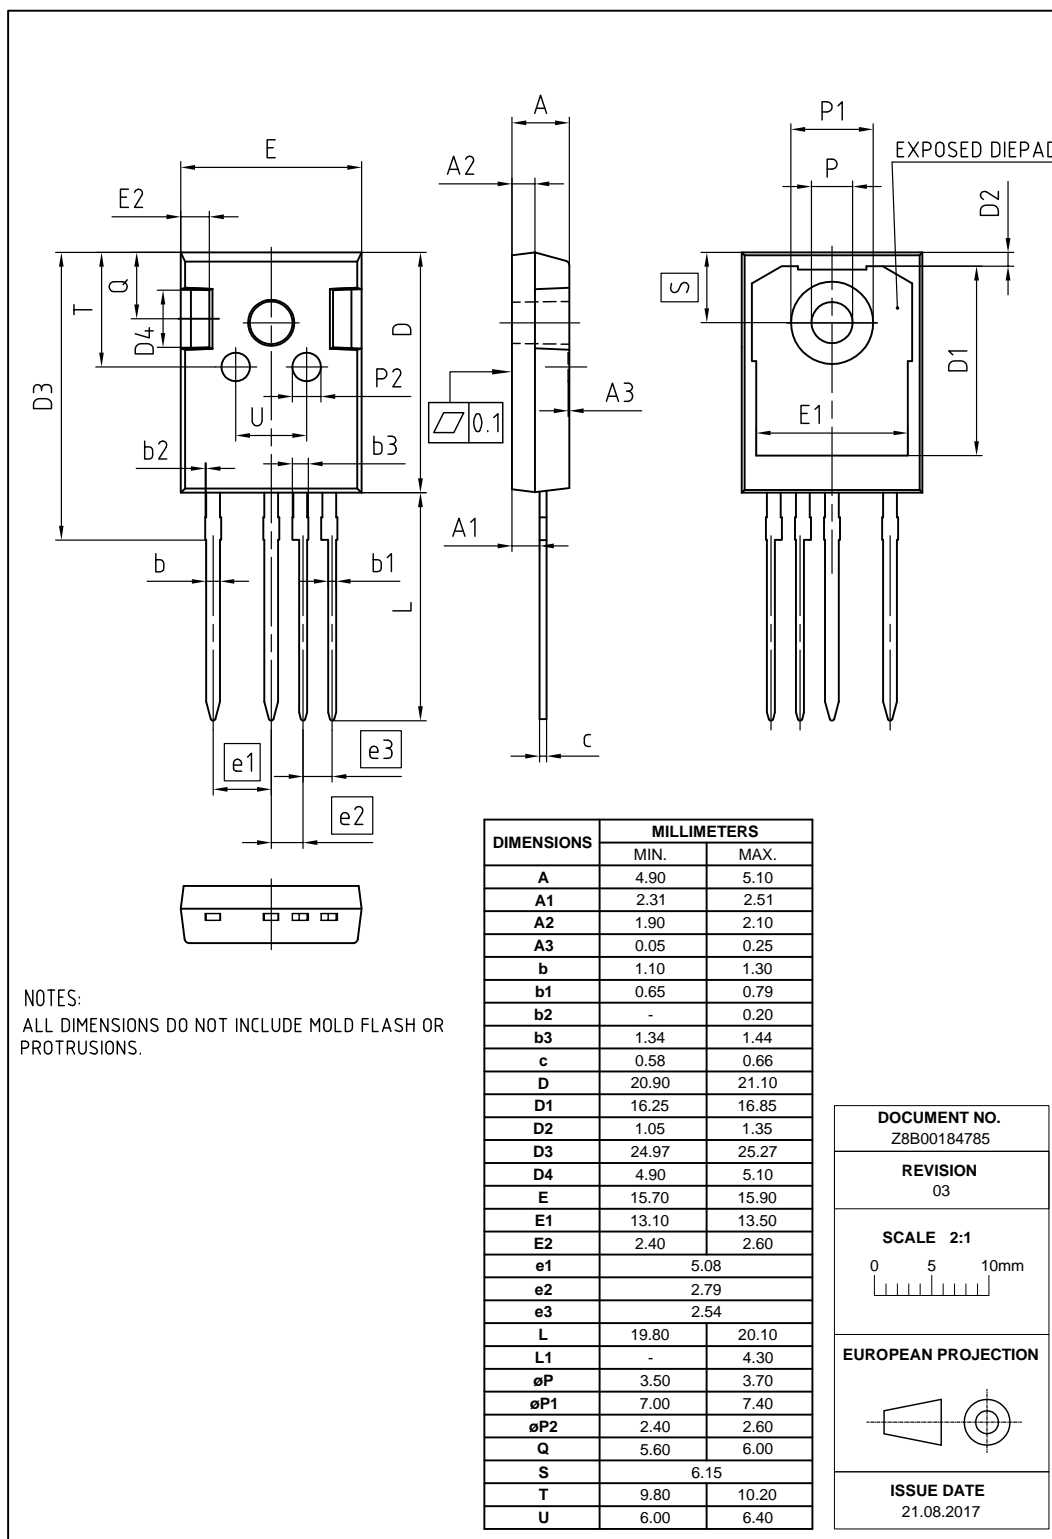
Outline PG-TO 247-4-3, dimensions in mm
